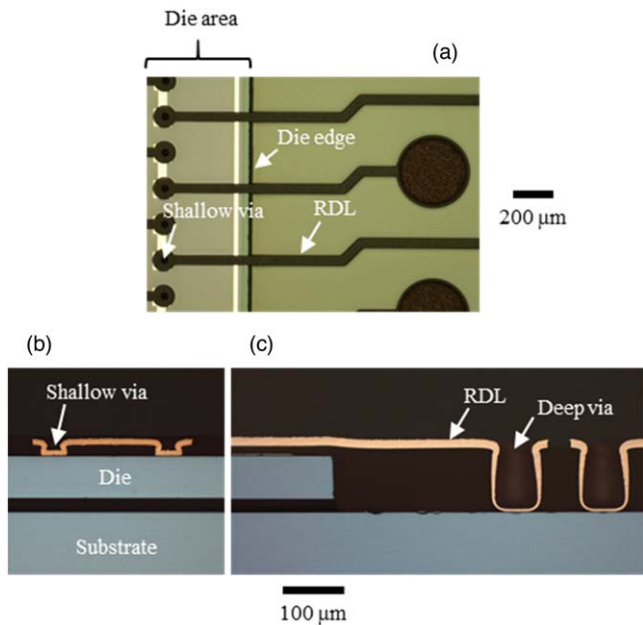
(Color online) Photograph of a developed prototype package. (a) Top view of deep vias. (b) Cross-section of the embedded die edge. (c) Cross-section of deep vias.
